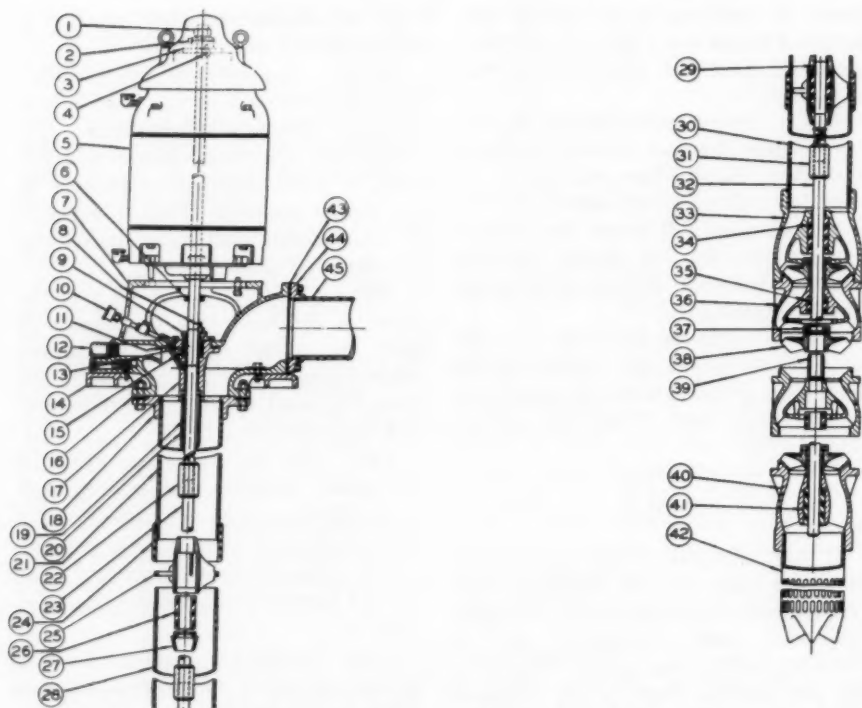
Open Line Shaft Pump (Surface Discharge, Threaded Column and Bowls)
